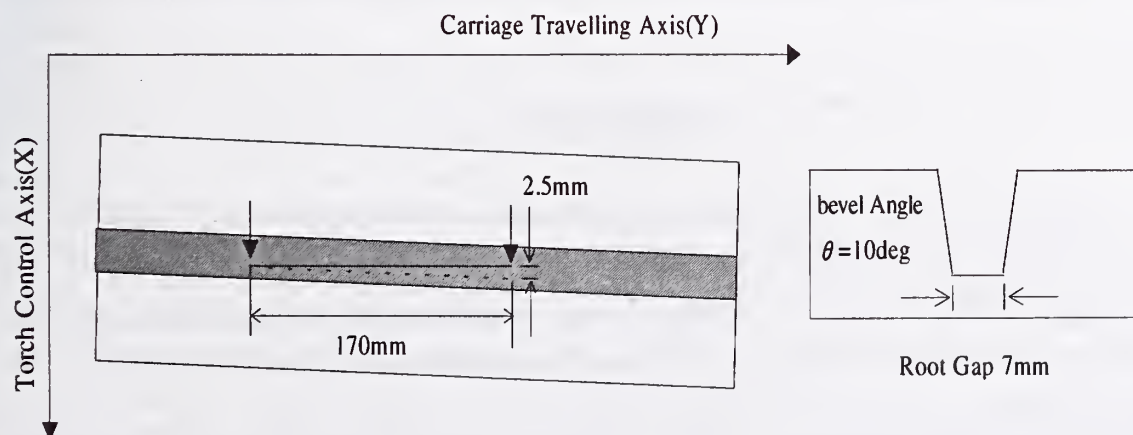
Relative Directions of Carriage Travel and Welding Groove
